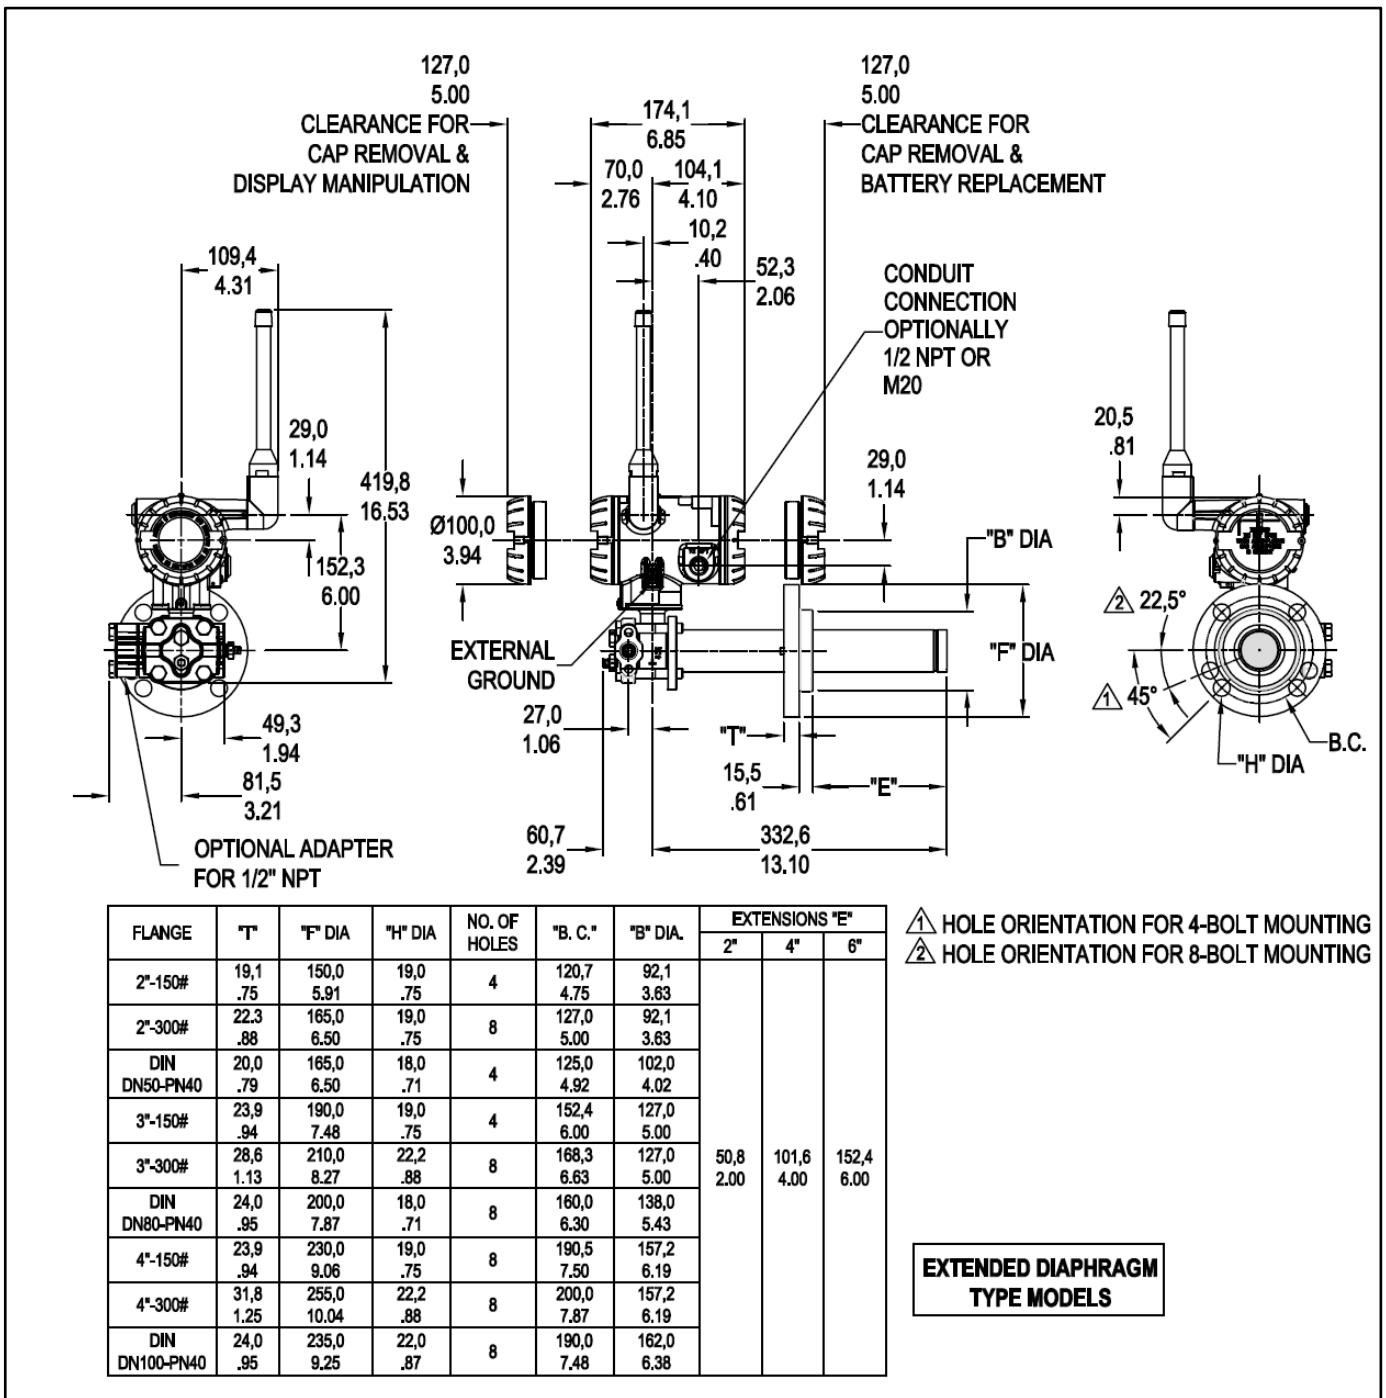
Typical mounting dimensions for extended diaphragm type models STFW828 and STFW724
